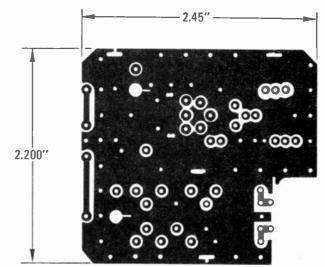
FOIL PATTERN of bottom side of double-sided main board shown actual size.
